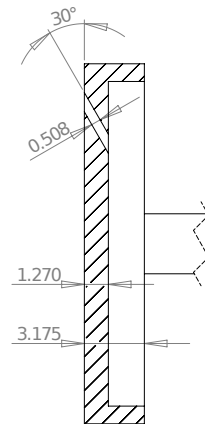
Drawing of one trench row test coupon; freestream flow from bottom to top; dimensions in mm
